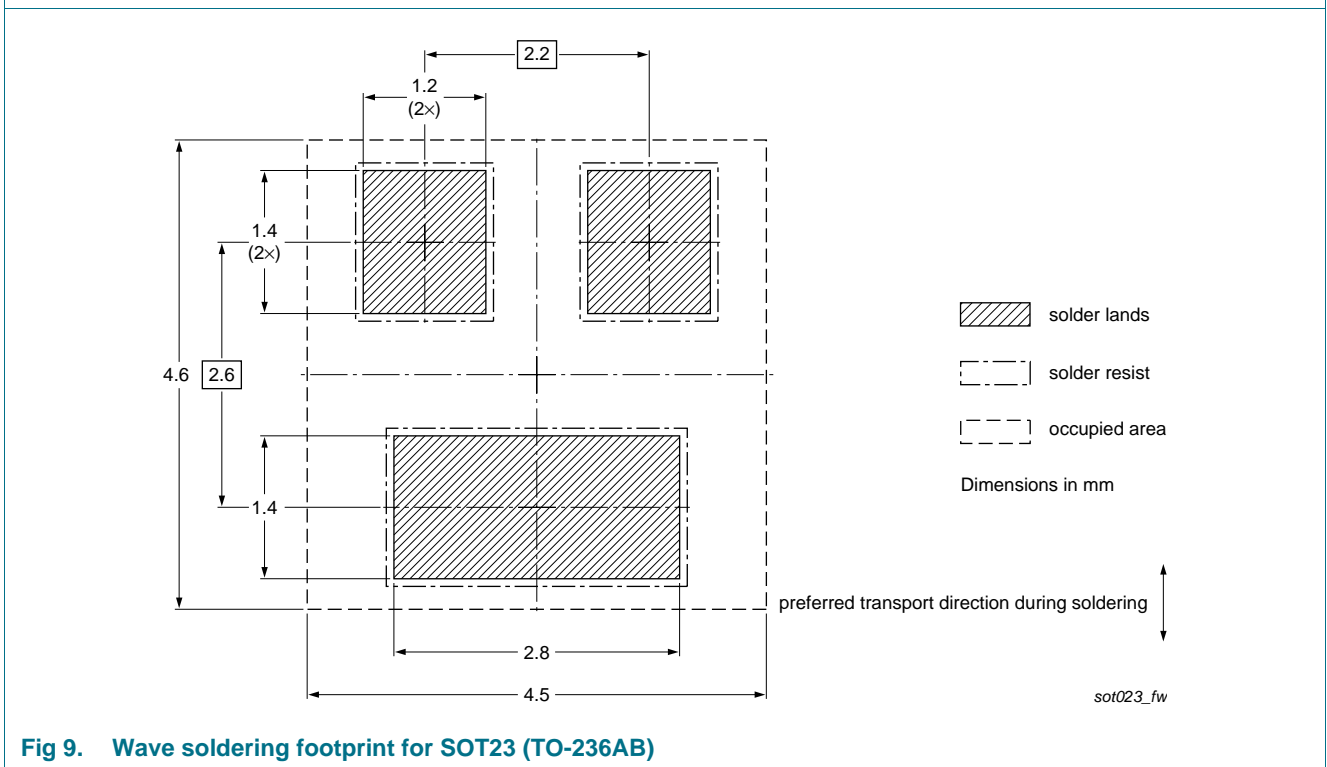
Wave soldering footprint for SOT23 (TO-236AB)
